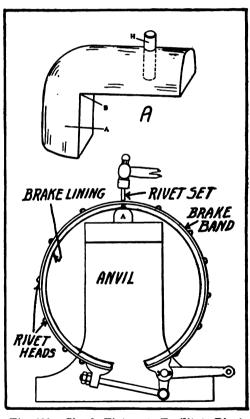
Simple Fixture to Facilitate Riveting Brake Lining to Steel Brake Bands.
